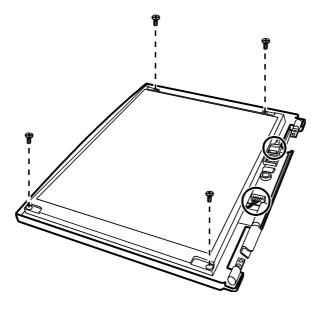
, REMOVING THE FLAT PANEL SCREEN
